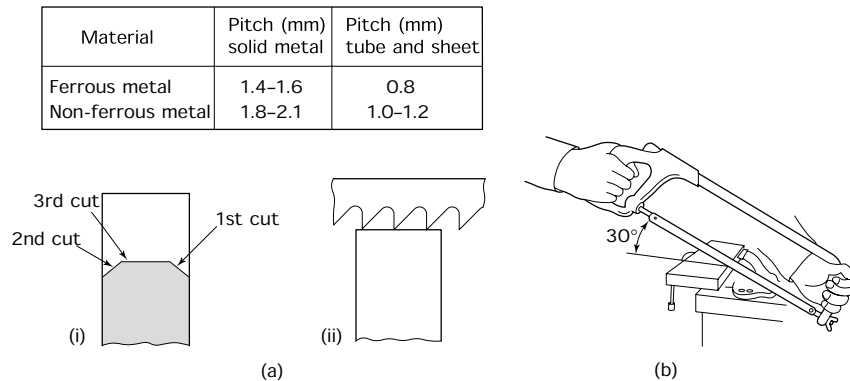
The hacksaw blade: (a) blade selection – (i) a wide component should be broken down in a series of short cuts; (ii) the pitch of the blade should be chosen so that at least three teeth are in contact with the workpiece all the time; (b) use of a hacksaw
